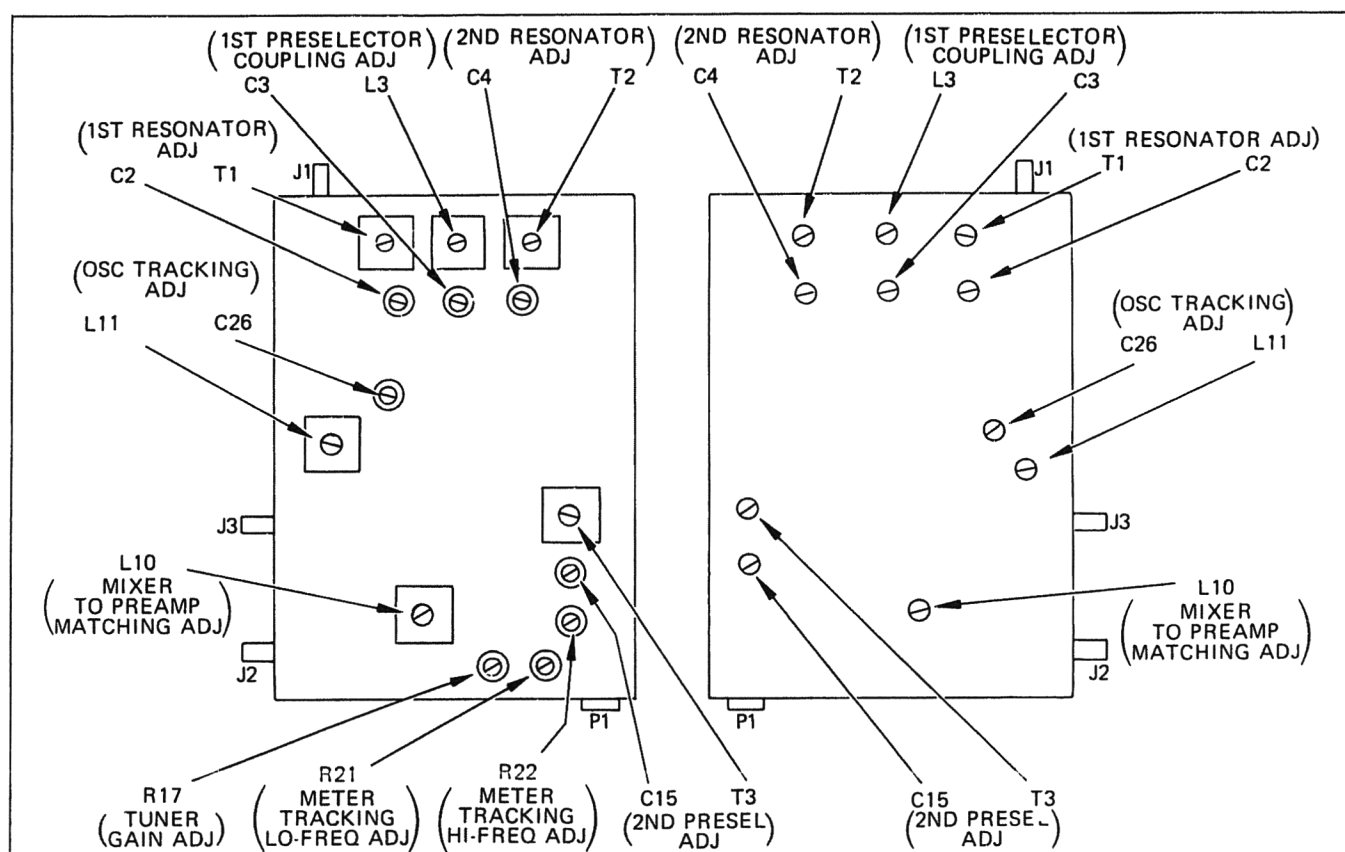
Trimmer Locations, Band 8 Tuner Assembly, A8
